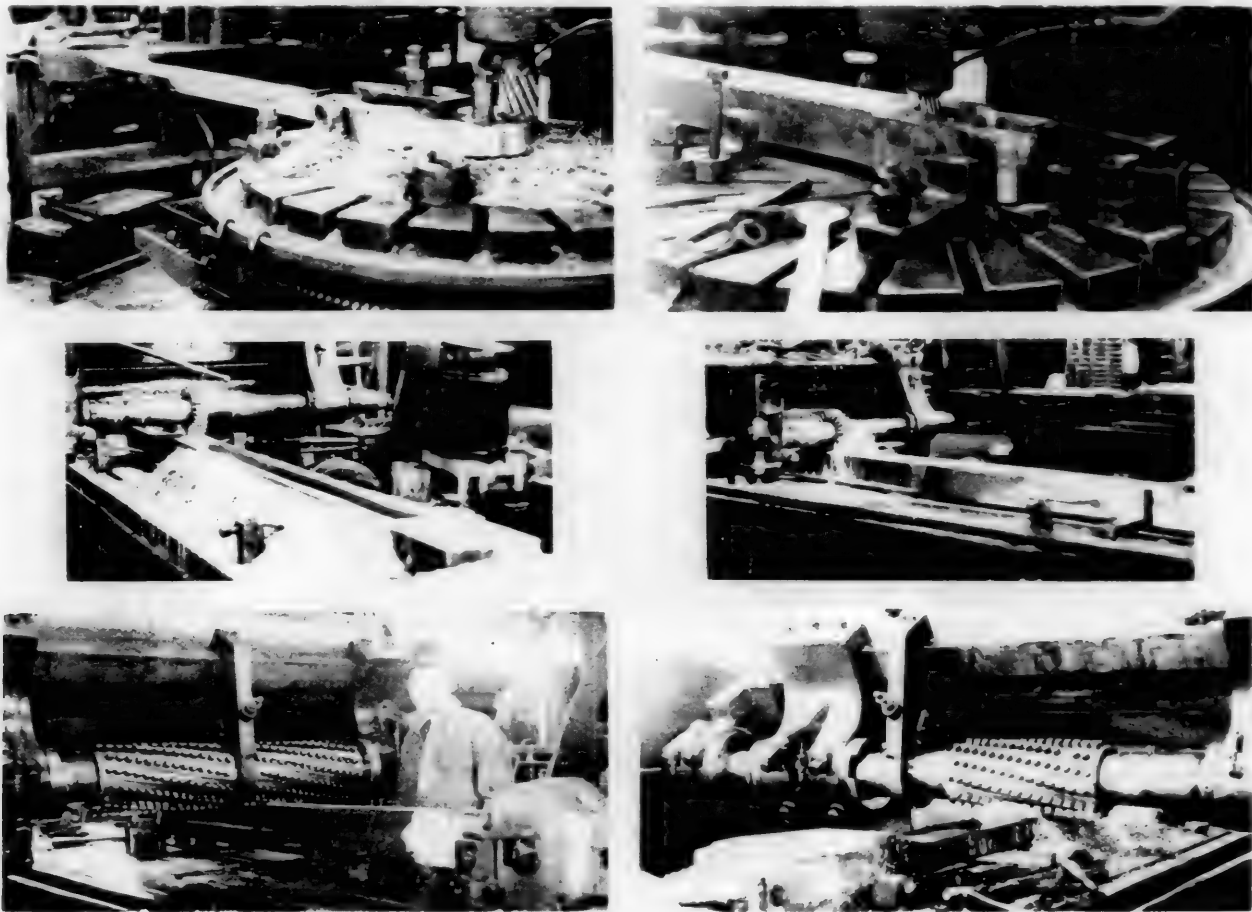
Examples of Locomotive Work Done with Modern Milling Cutters
